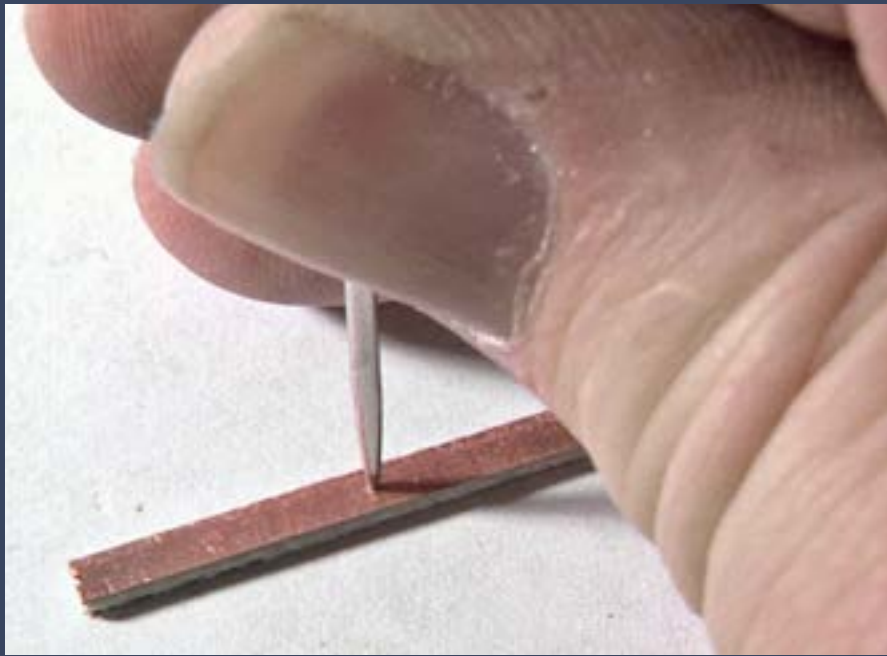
I cut a PC tie to a standard scale 9 foot length and center punch it for drilling the throwrod hole.
